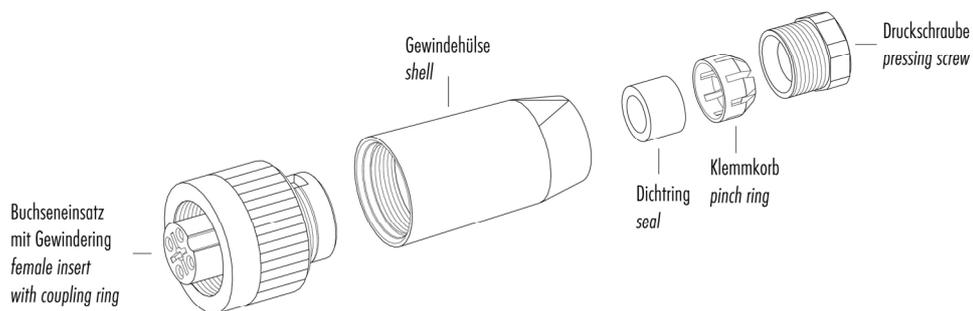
Installation instructions for plug connector of connection 3 (24V DC)
